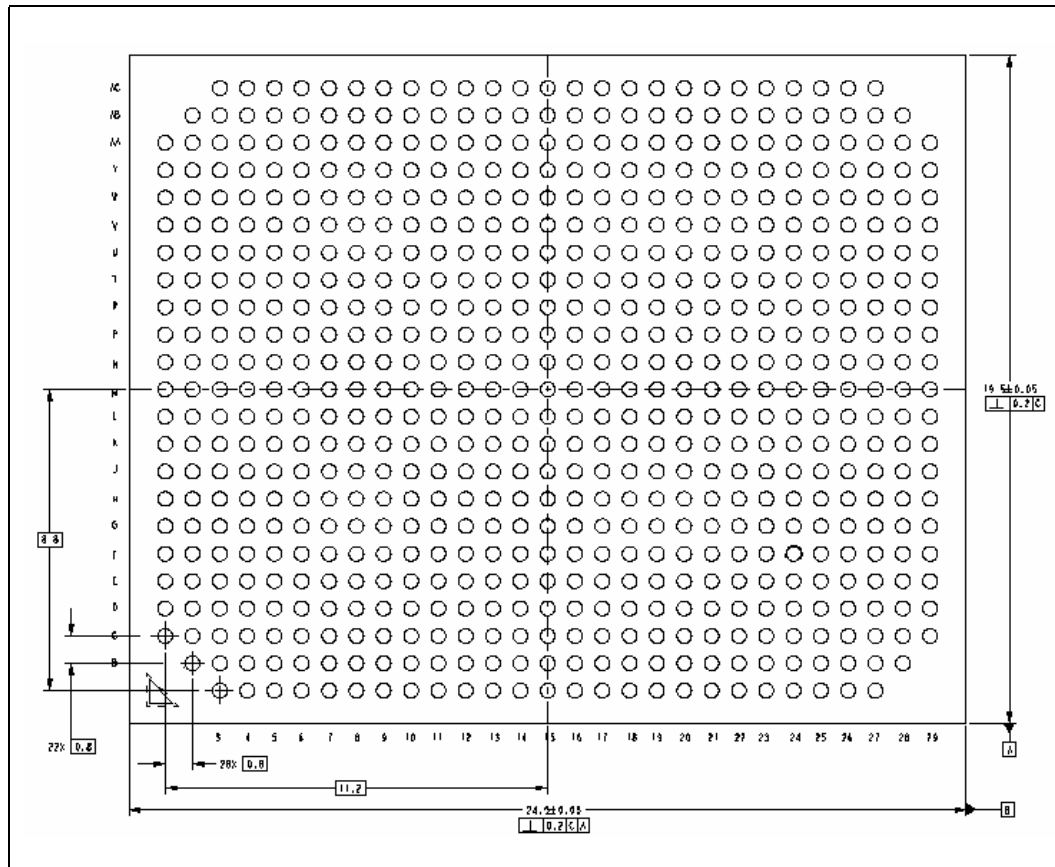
Intel 6400/6402 Advanced Memory Buffer Package Dimensions (Btm View)
